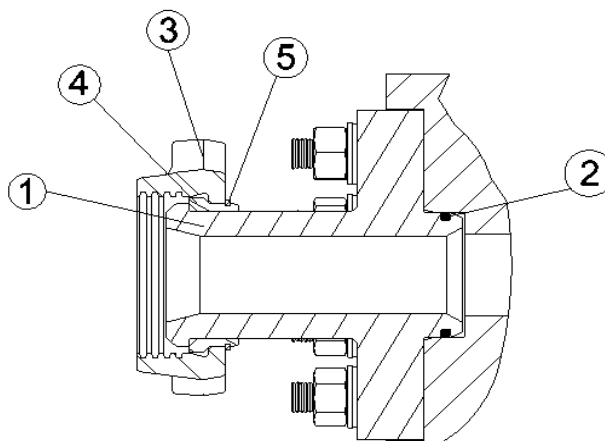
3" 1502 MALE UNIMOUNTING DISCHARGE FLANGE ASSEMBLY
